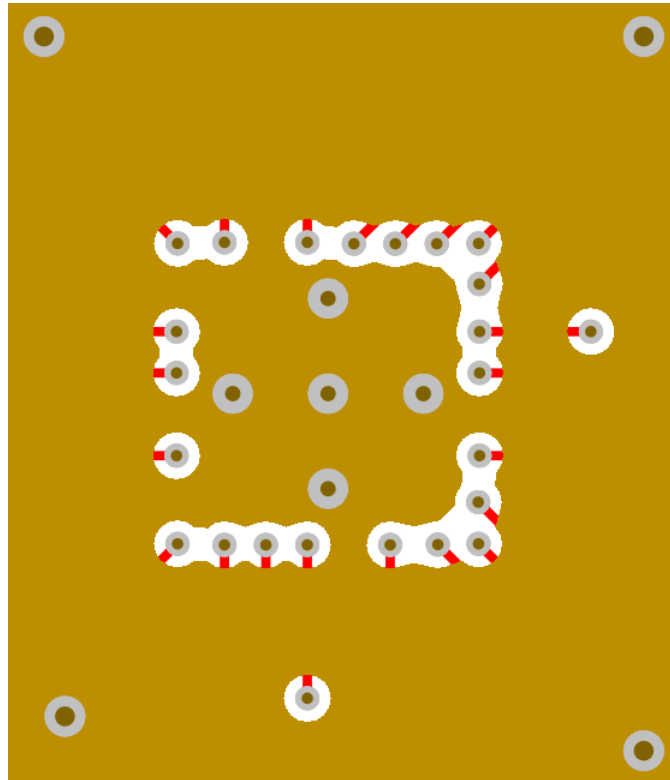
PCB Layout Example for CDCDB2000, GND Layer
